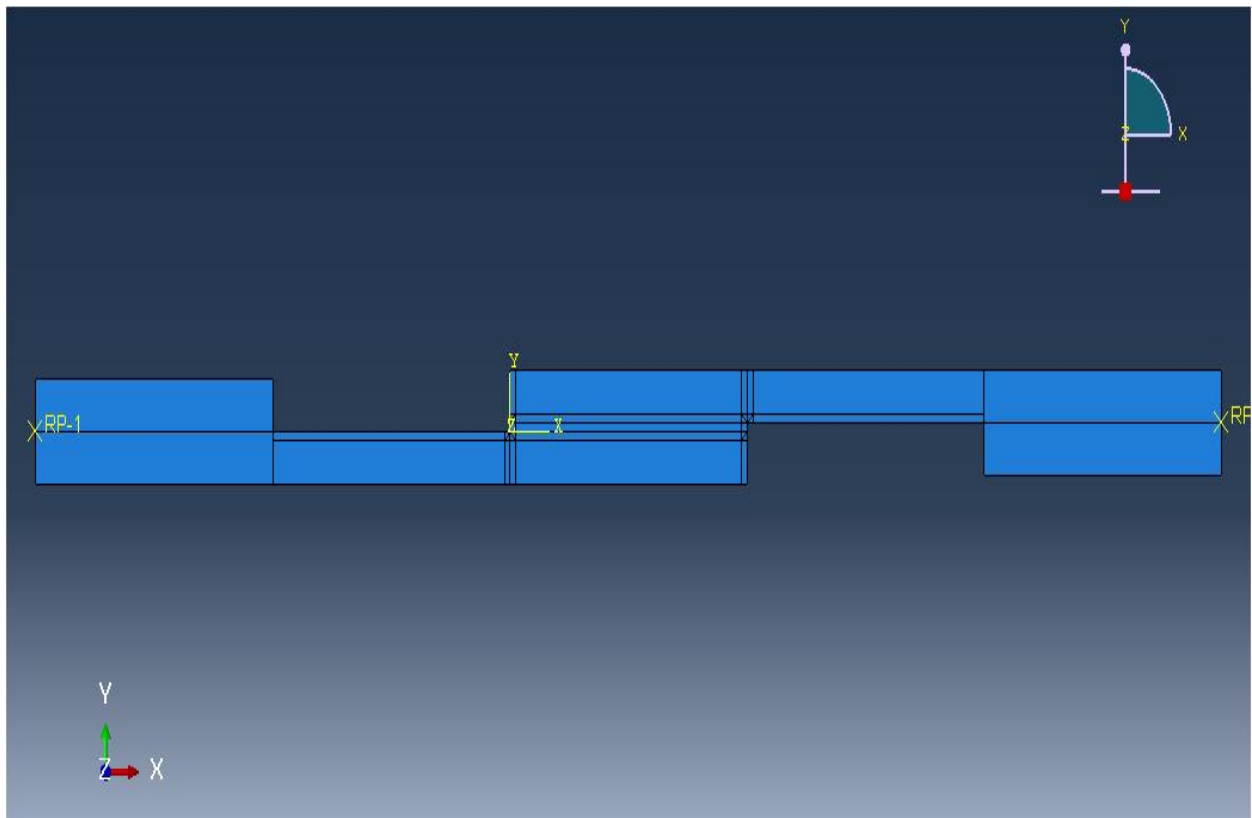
Finite element (ABAQUS) model for single lap joint.
